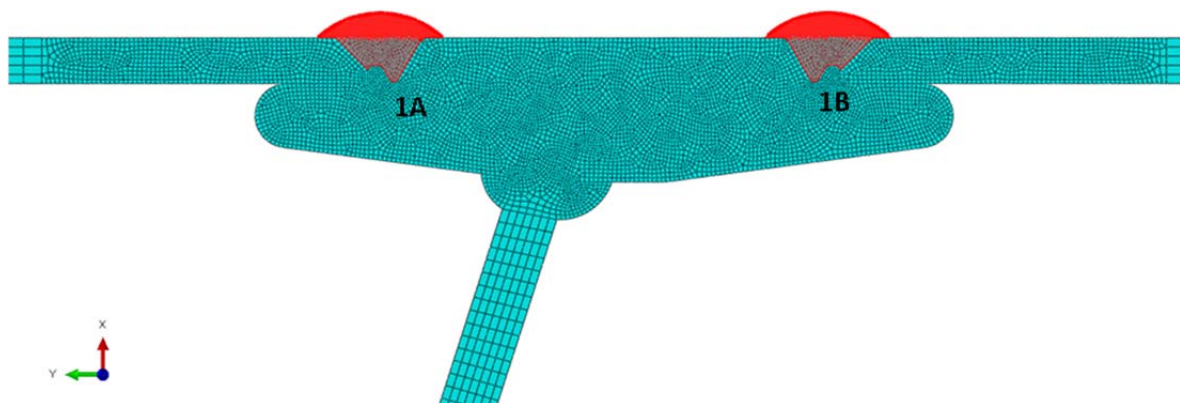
Weld passes. Note that a 'seam' was used to model the unfused surfaces between the tanker band extrusion profile and the tanker shell.
